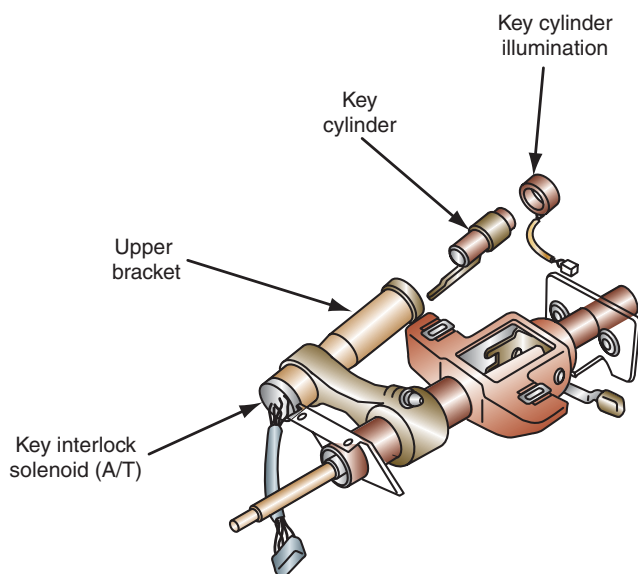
Ignition key cylinder illumination mounted above ignition switch cylinder.
